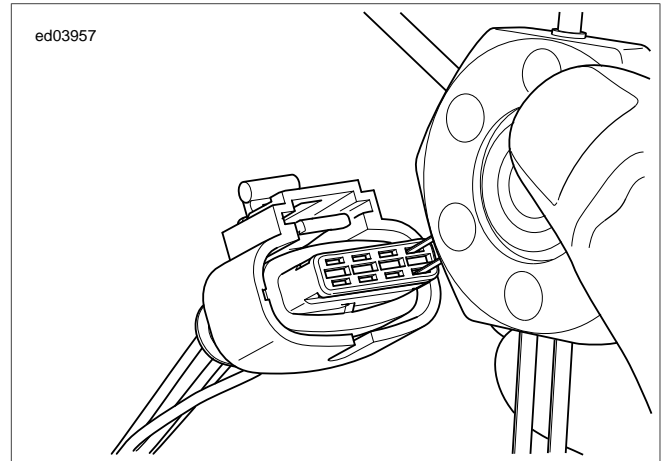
Terminal Removal: Bosch Compact 1.1M Connector
